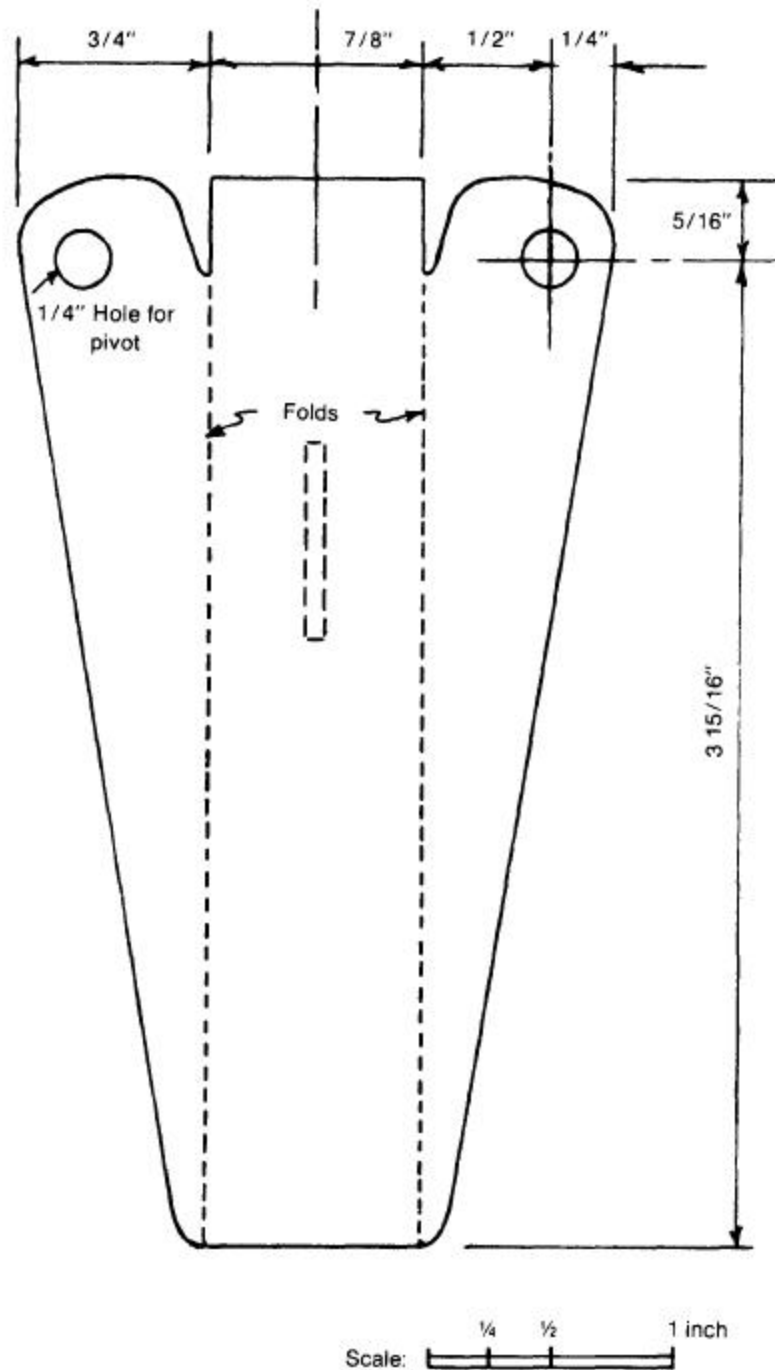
Template for cutting the 16-gauge sheet metal for the handle of the gritter.
